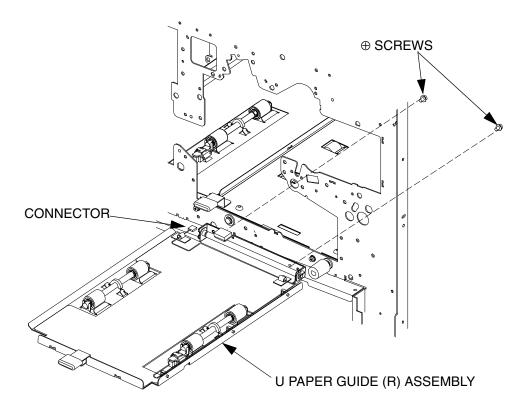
Removal of the U Paper Guide (R) Assembly
